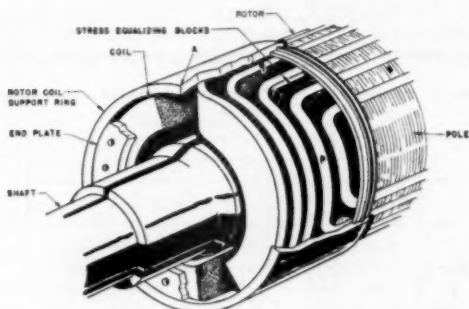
TURBOGENERATOR ROTOR-COIL SUPPORT RING AND COILS
